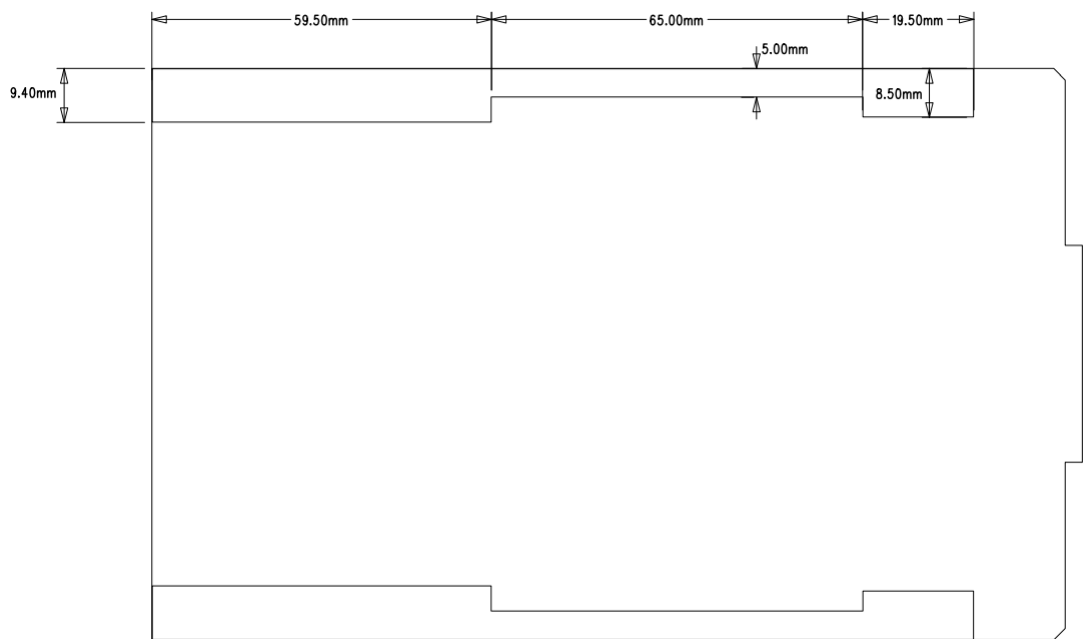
Component keepout area for the SURFv6. Dimensions are identical top and bottom. Direct contact with the board can be made in this area only.
